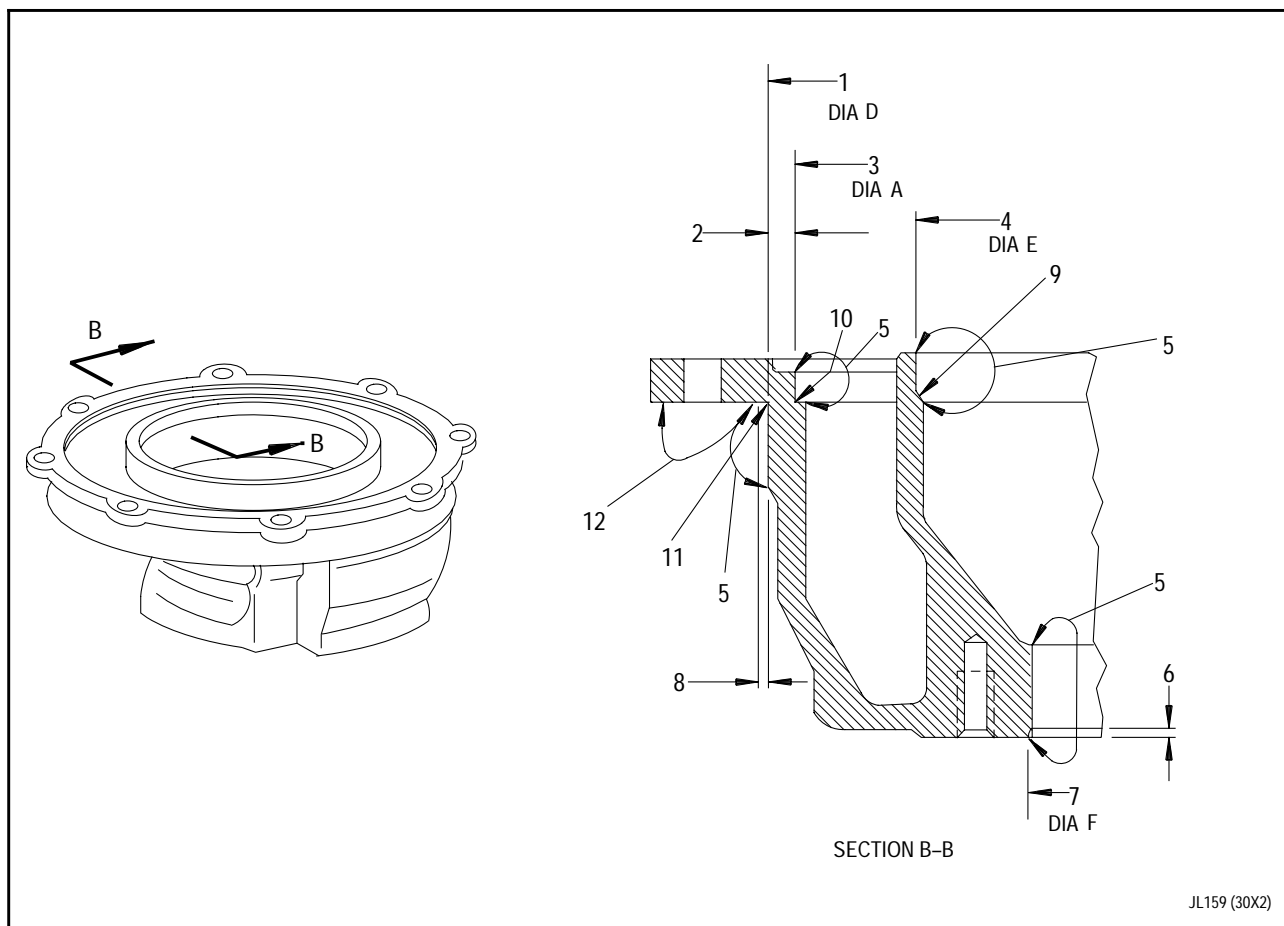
Gearbox Upper Cover Assembly - Snap Diameter Repair
